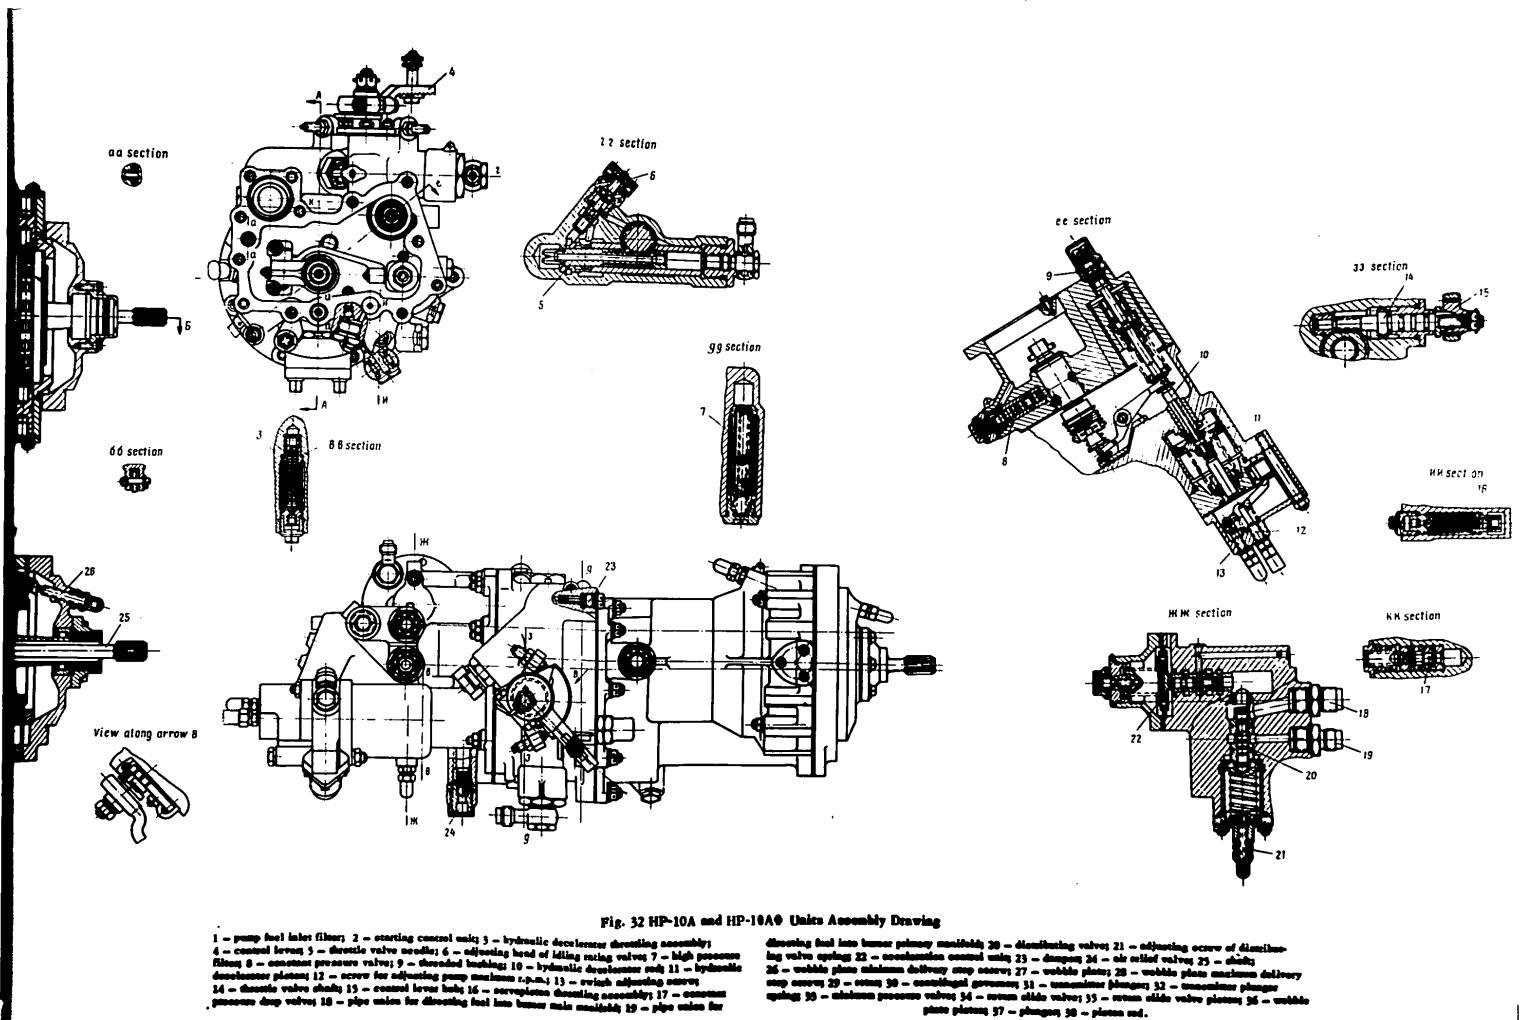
HP-10A and HP-10A9 Units Assembly Drawing
